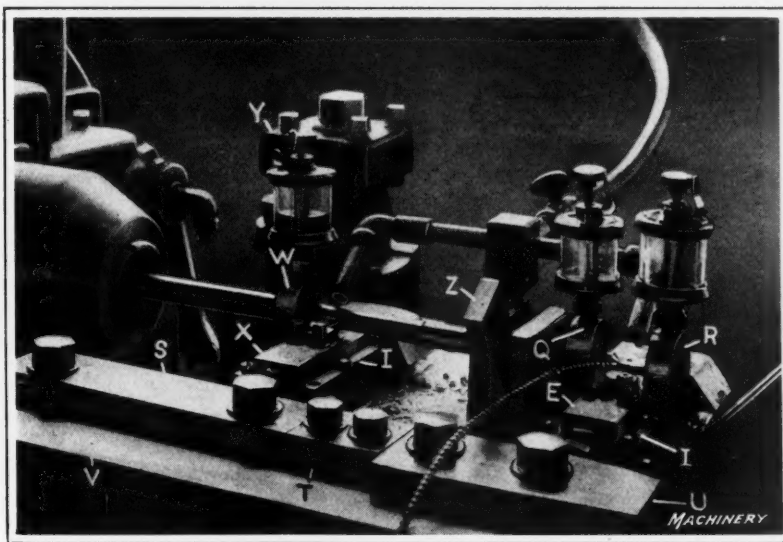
Taper-turning Tools in Operation on Spinning Machine Spindle
